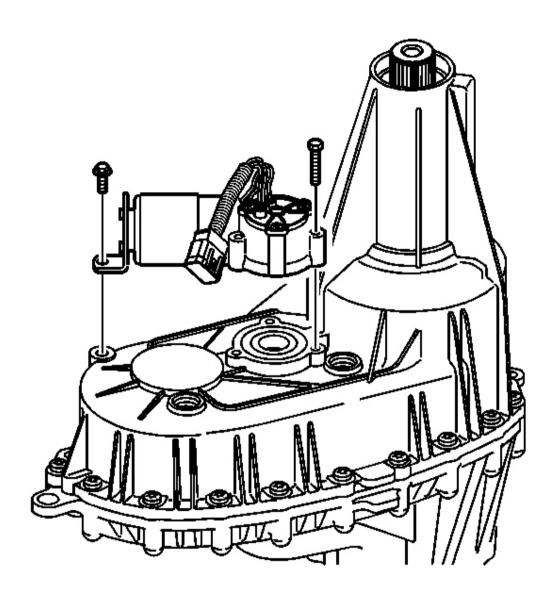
Identifying Encoder Motor Assembly Courtesy of GENERAL MOTORS CORP.
